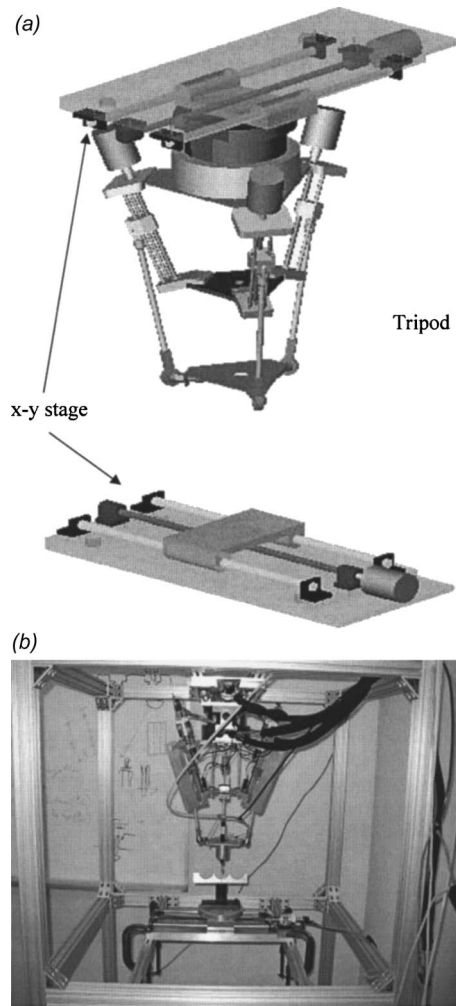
(a) Design model of the hybrid machine and (b) Prototype of the hybrid machine at Ryerson University
